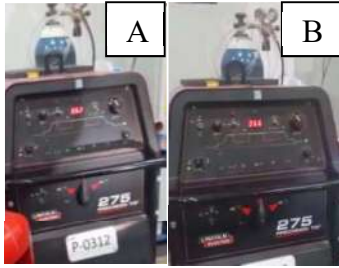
Image of the TIG welding machine during samples welding operation.
